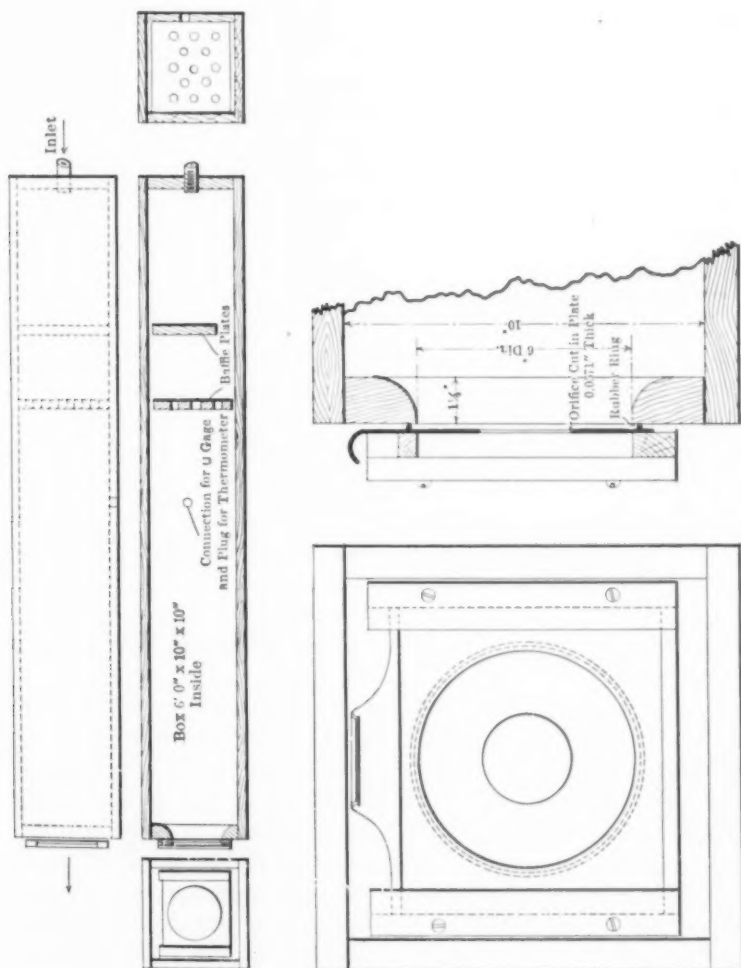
DETAILS OF GAUGING BOX AND ORIFICE.
